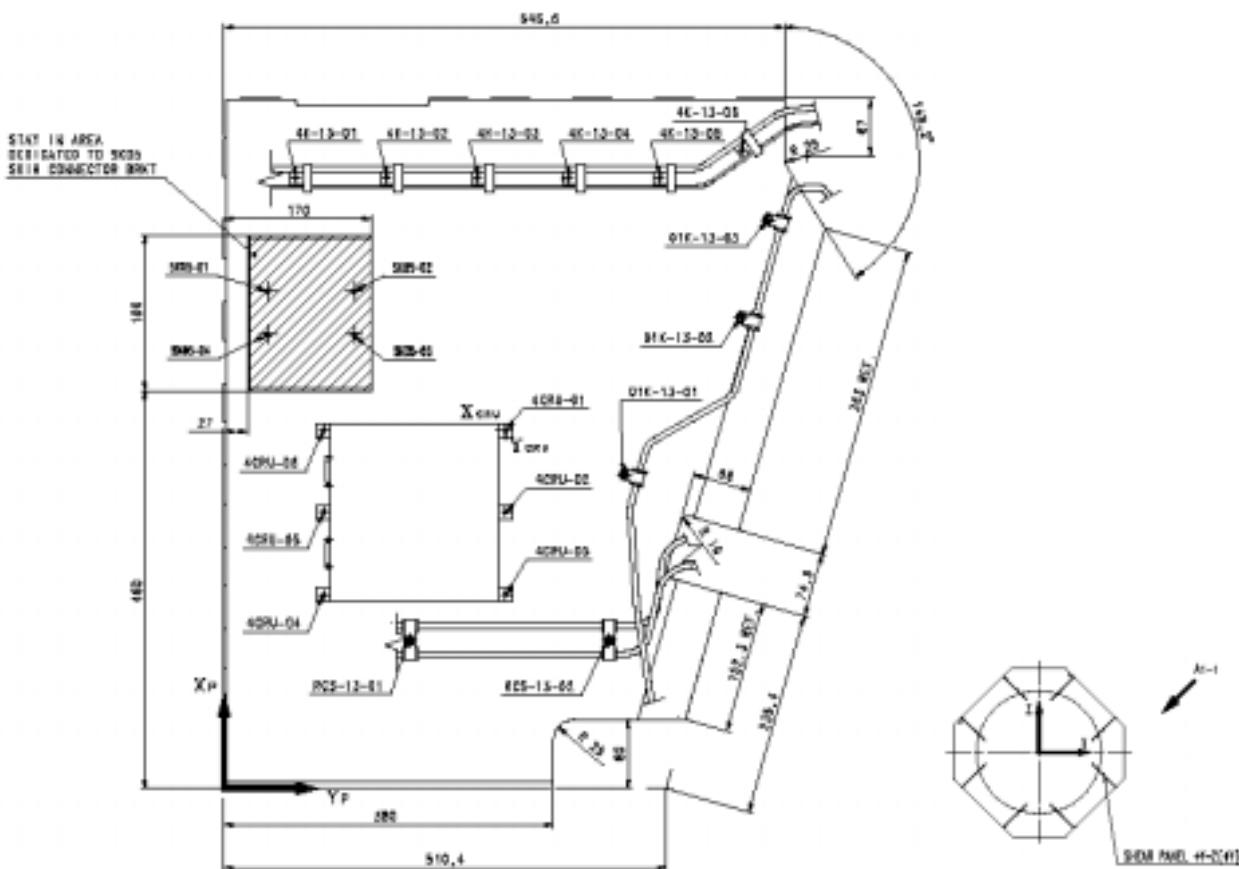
CRU equipment on +Y-Z(+Y) shear panel
